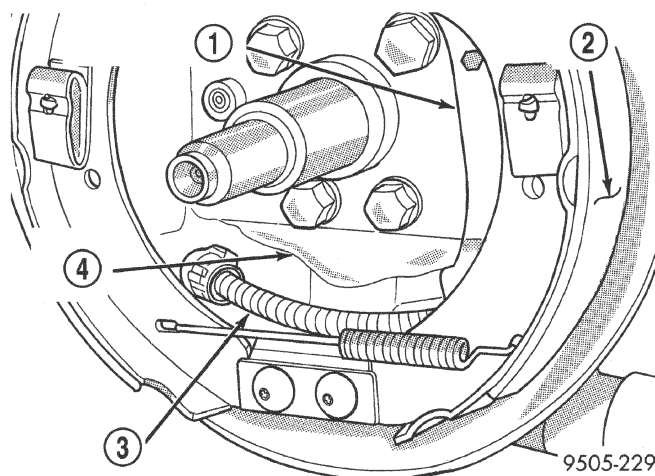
Rear Wheel Speed Cable Routing And Attachment
